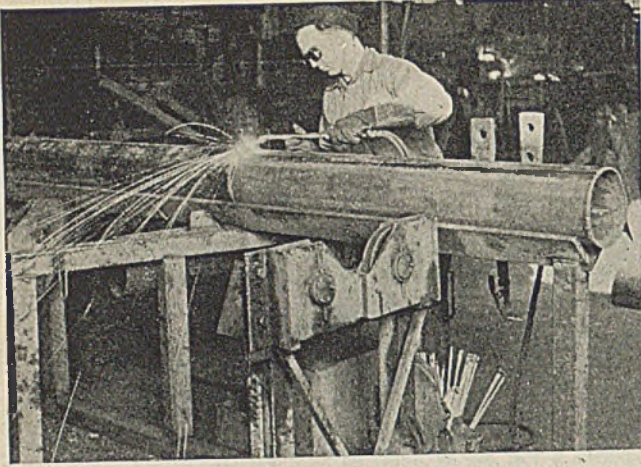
(Left, above)—This subassembly is tack welded in large rolled L-section, then moved over on rollers where work is revolved easily for finish welding
